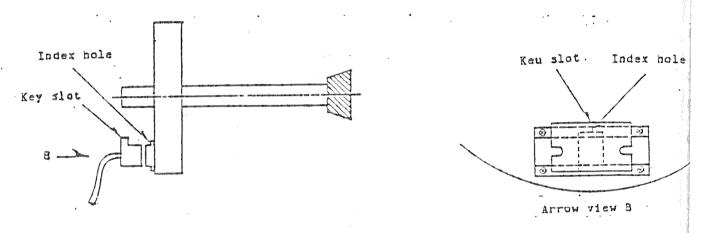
Mounting onto a flat surface on the non-load side of the rotating body
